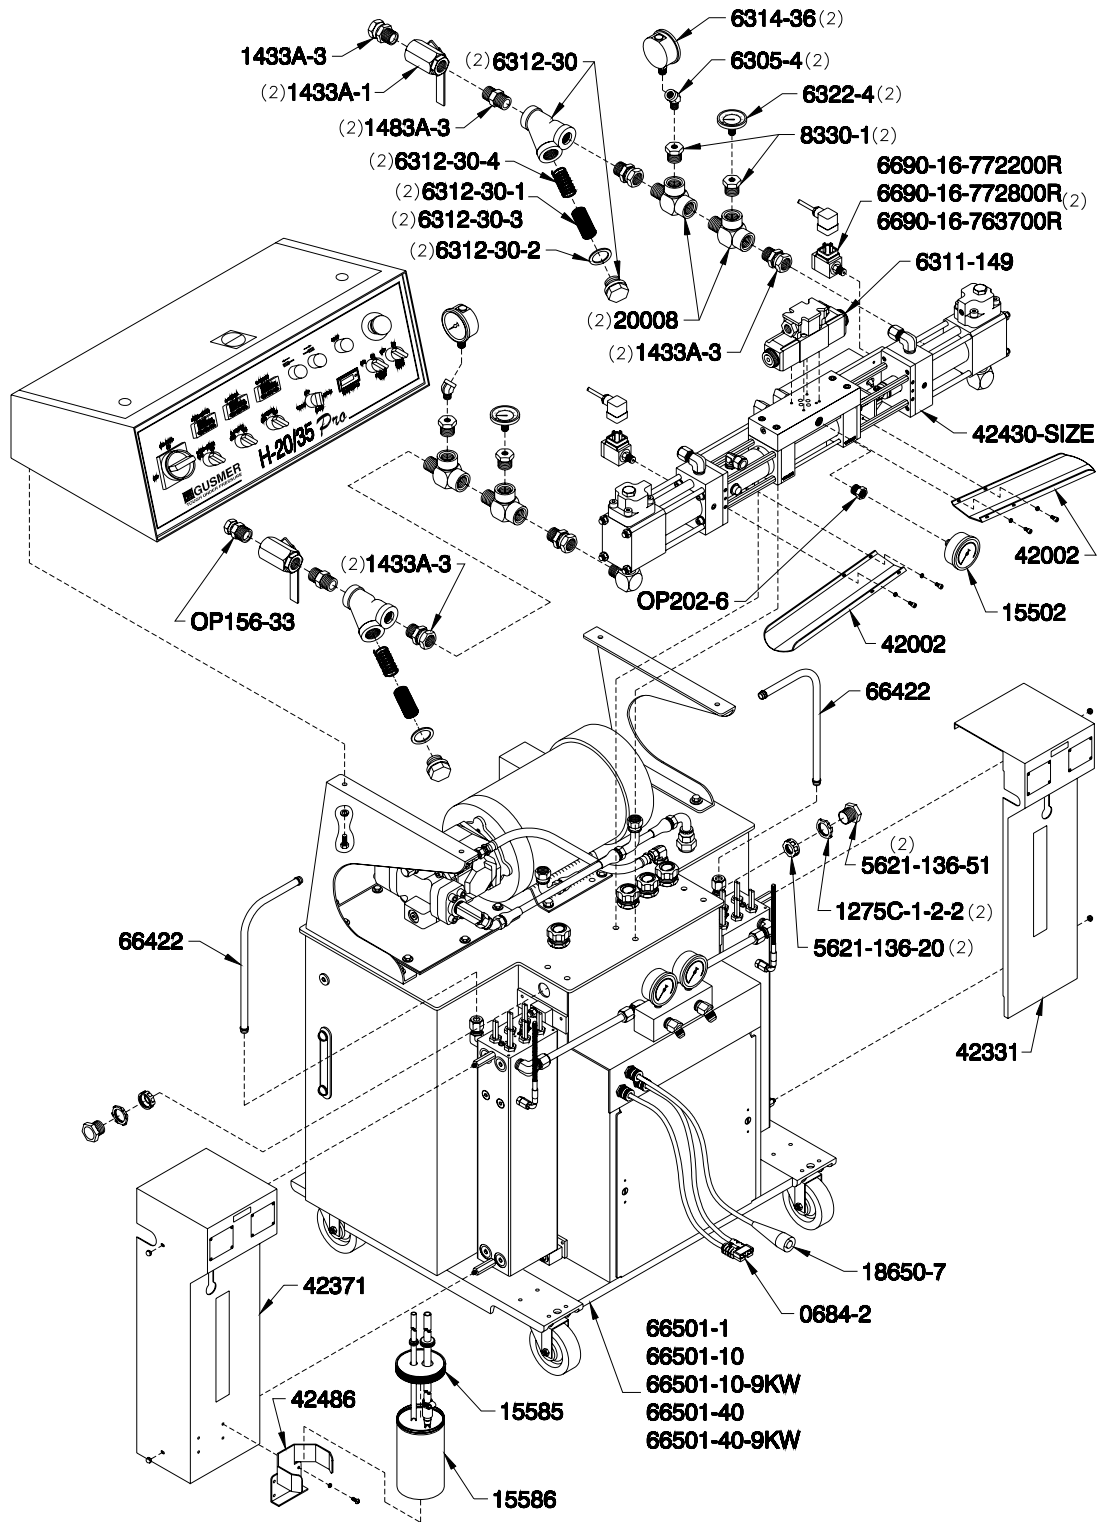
Final Assembly (Part No. 66000-SIZE), Exploded View
